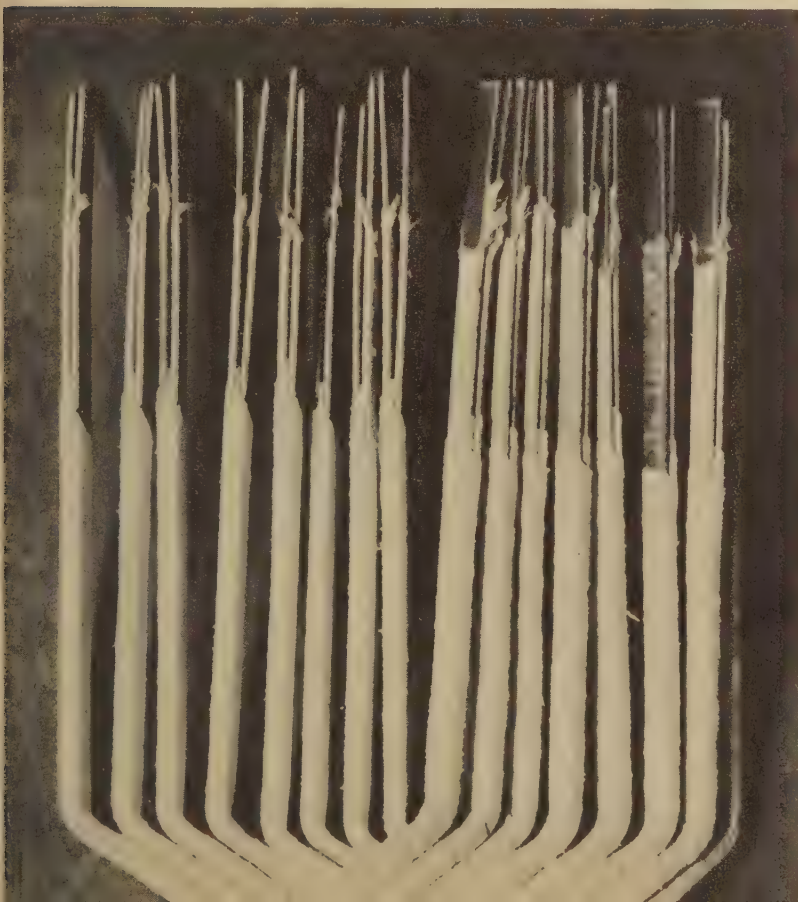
The wires and risers of the commutator are welded together under water, the fixture enabling an experienced welder to make as many as 65 welds in a commutator in 17 min.
